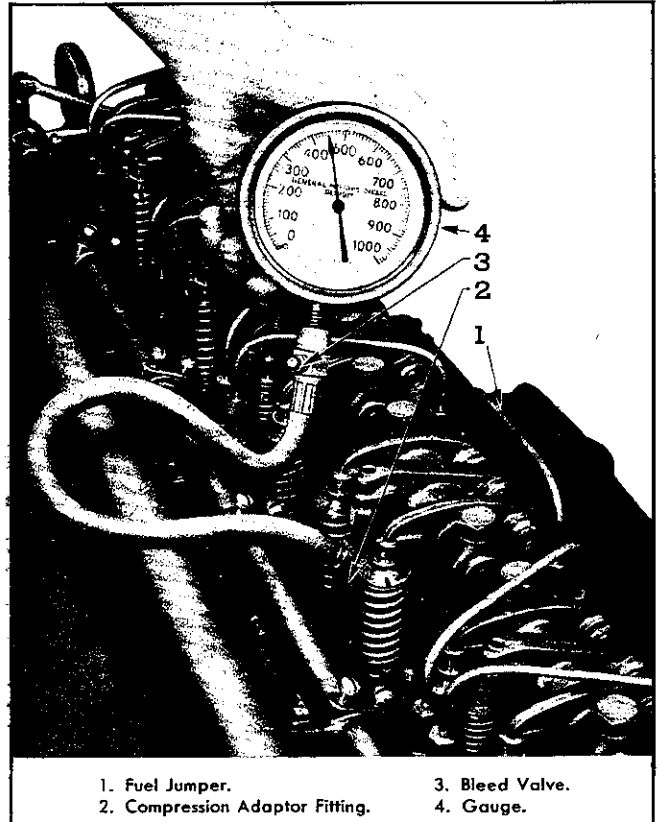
Checking Compression Pressure with Tool J-1319-A
